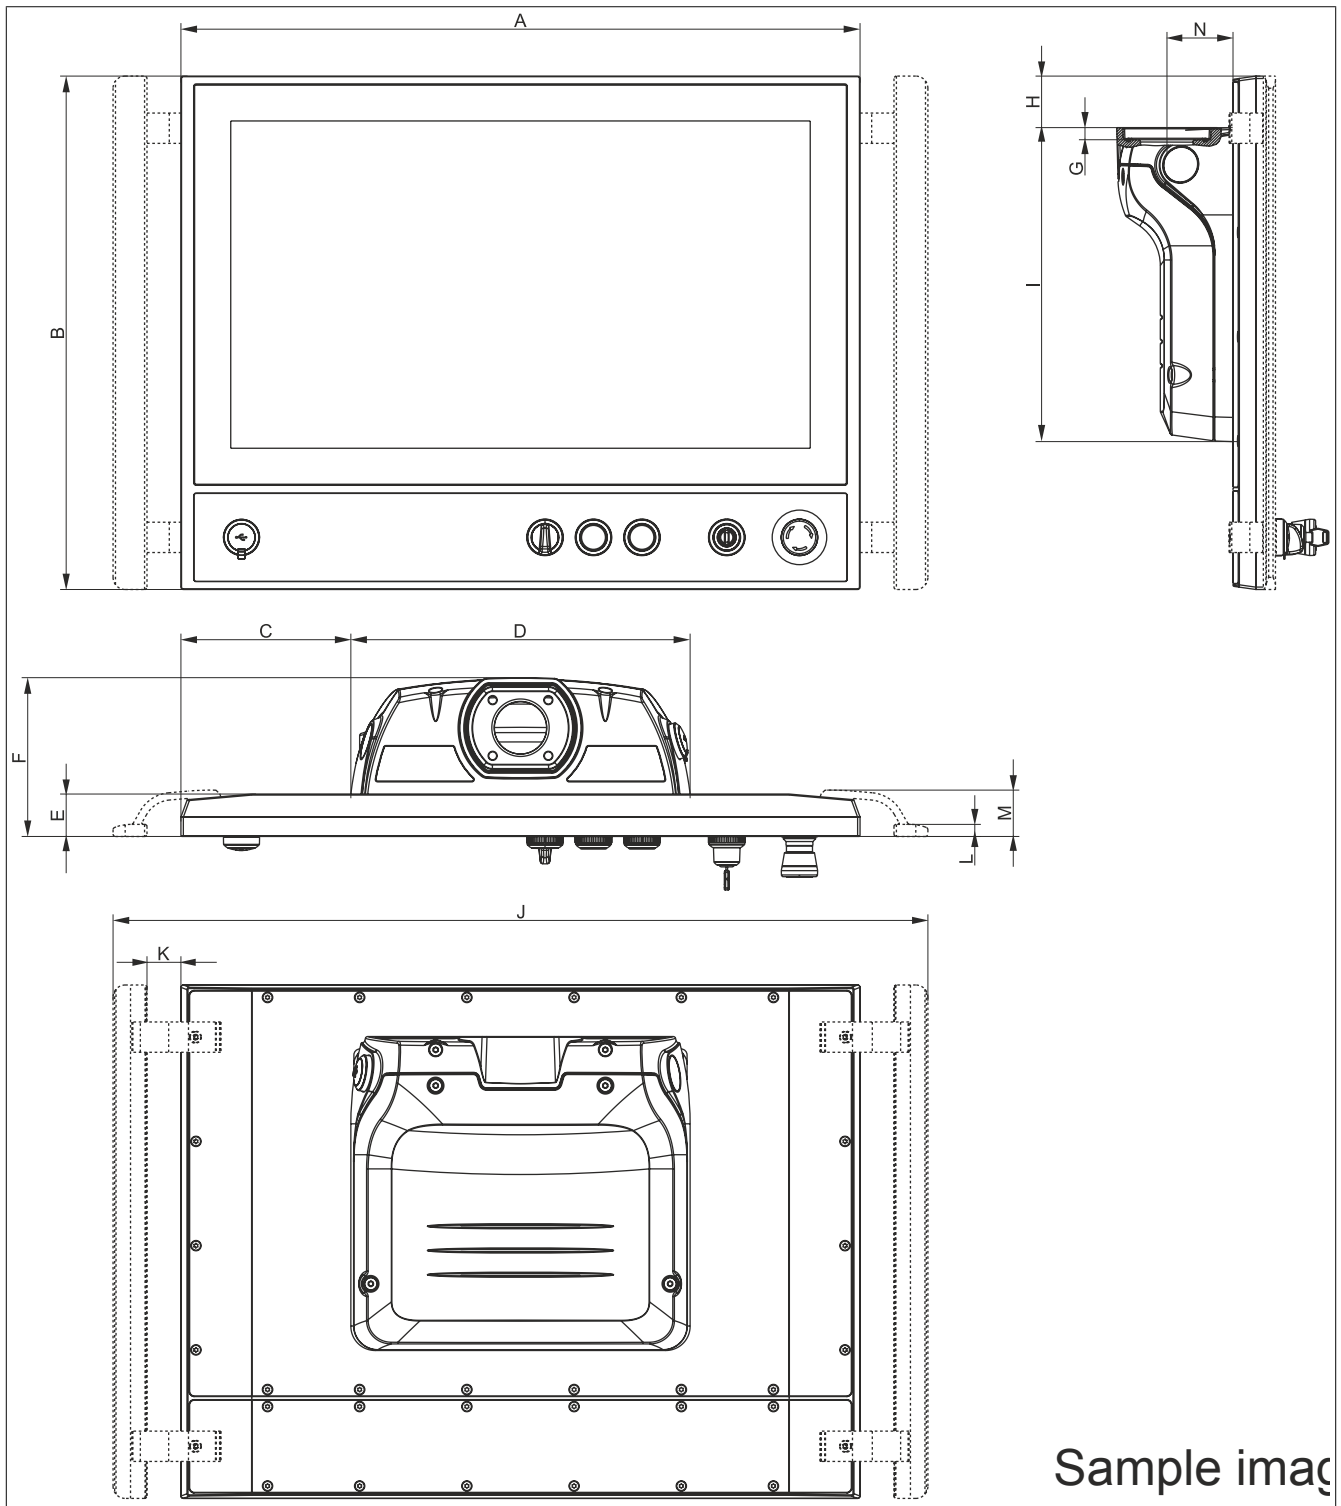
AP5120/AP5130 (flange connection on bottom) with 5ACCMA00.000x-000 and 5ACCHD0x.xxxx-000 - Dimensions
